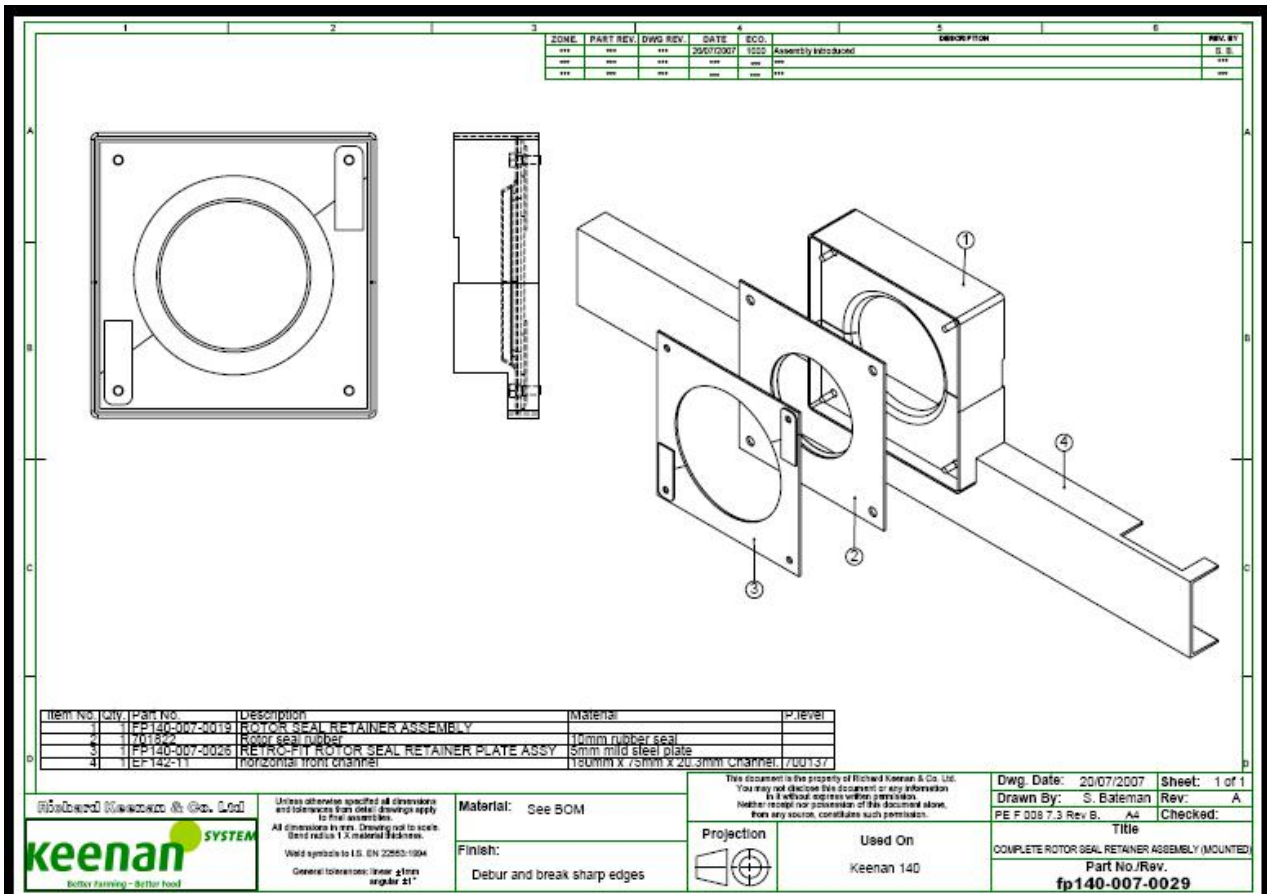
Shows the mounting position for the assembly onto the front of the machine
